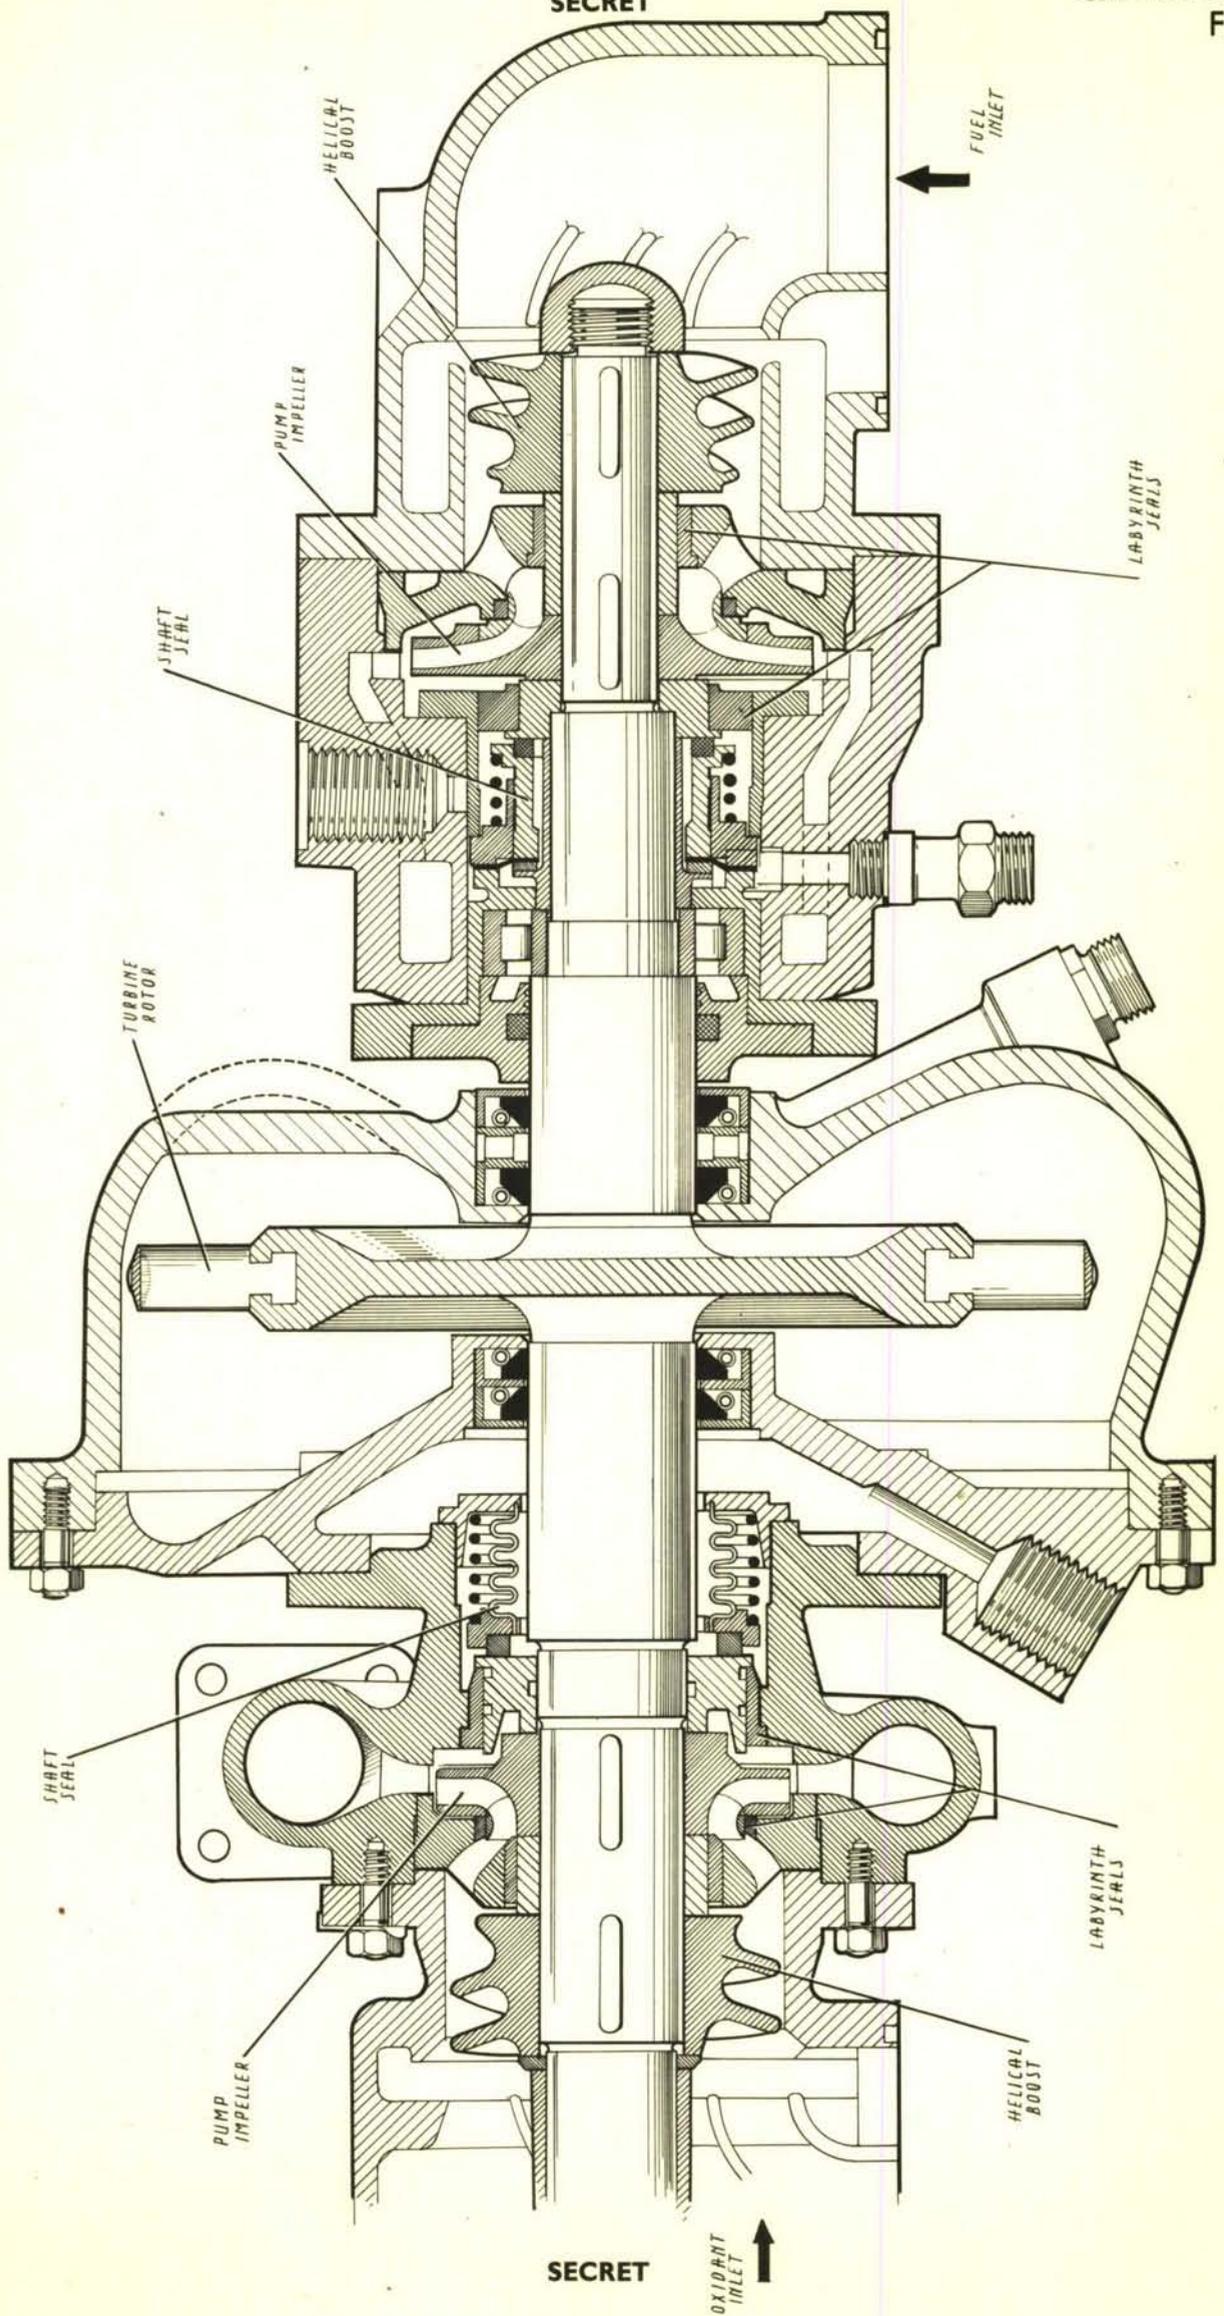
ROCKET MOTOR TURBO-PUMP SET
